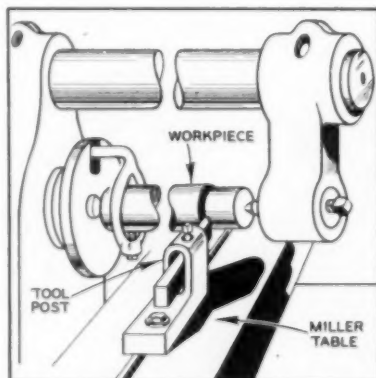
, at left, shows how large work may be turned or faced on a milling machine by swinging it between the table and the column. Depending on diameter of the work, the turning tool may be held in a vise or clamped to an angle iron, as shown. Fig. 14, at right, shows how work may be chucked or otherwise held for boring. Here, the tool is held in a vise. In either case, the miller is used as a lathe.
